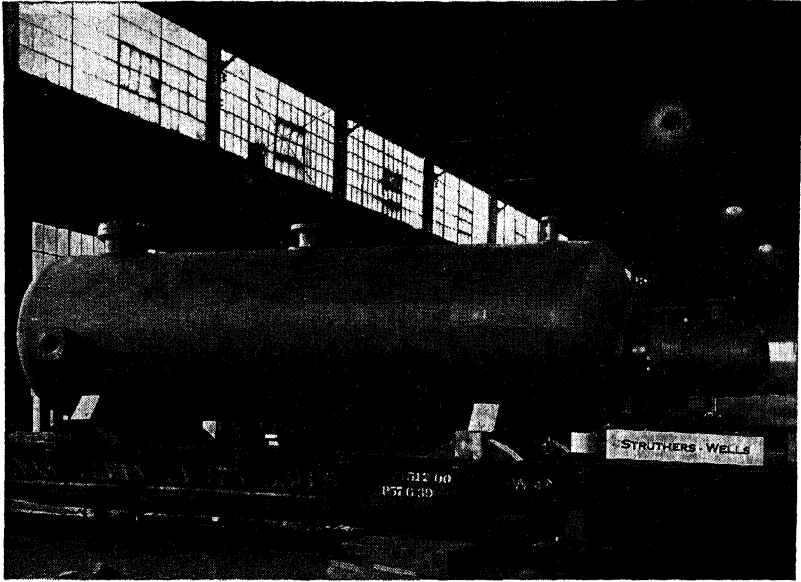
Shell and tube reboiler. 6 ft. x 20 ft. $1\frac{1}{4}$ -in. plate. 400 lb. working pressure. Weight 40,000 lbs. Welded according to A.P.I.—A.S.M.E. code, stress relieved and X-rayed.
